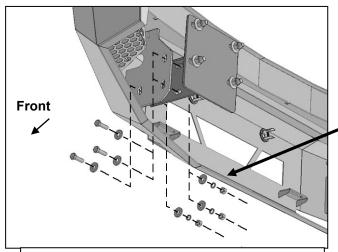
Disassemble bumper and remove sensors and wiring harness as equipped
